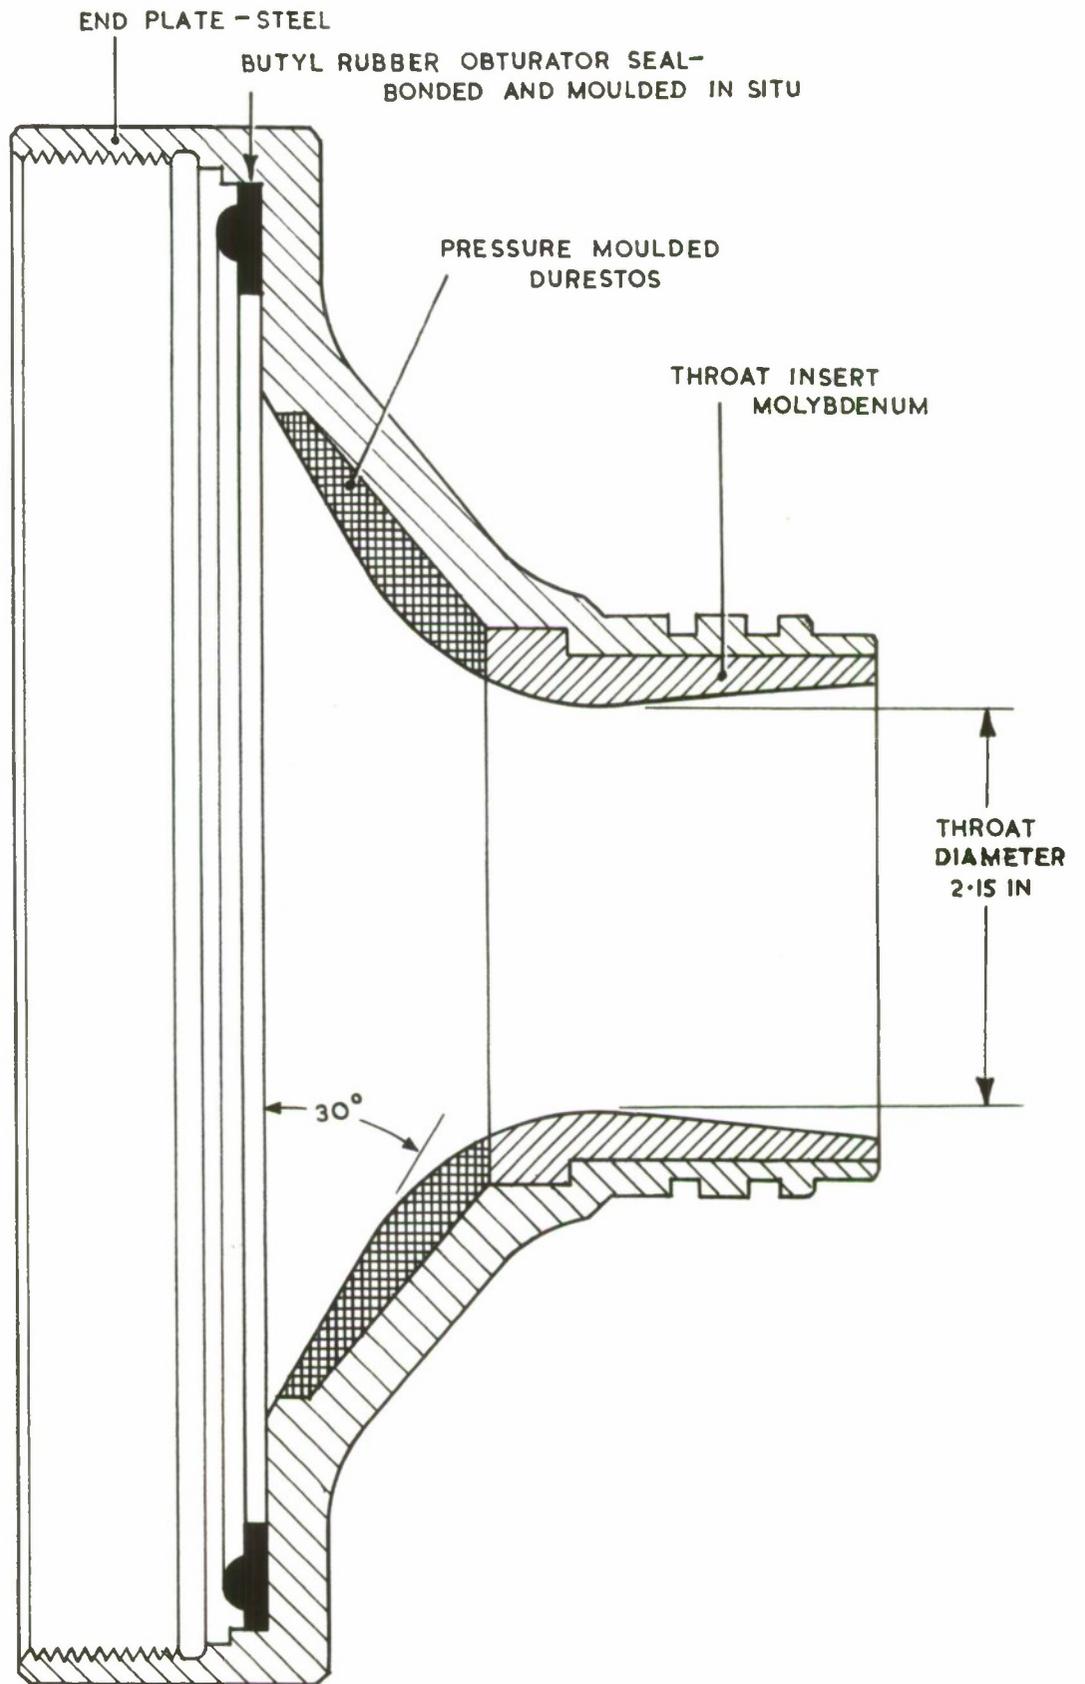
NOZZLE END-PLATE ASSEMBLY
